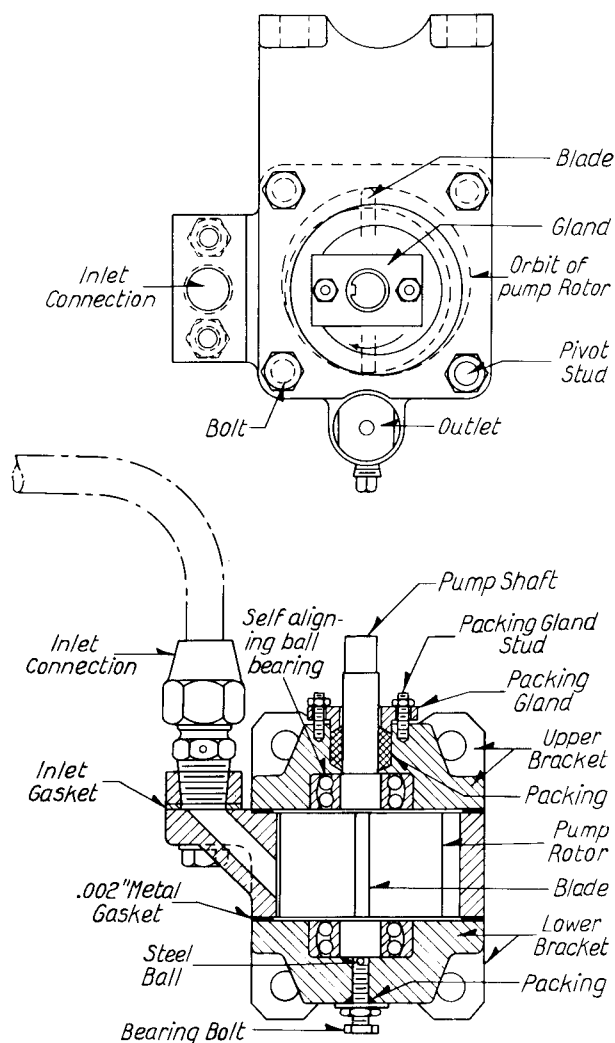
TOP AND CROSS SECTION VIEW OF ROTARY OIL-SEALED VACUUM PUMP ONLY
